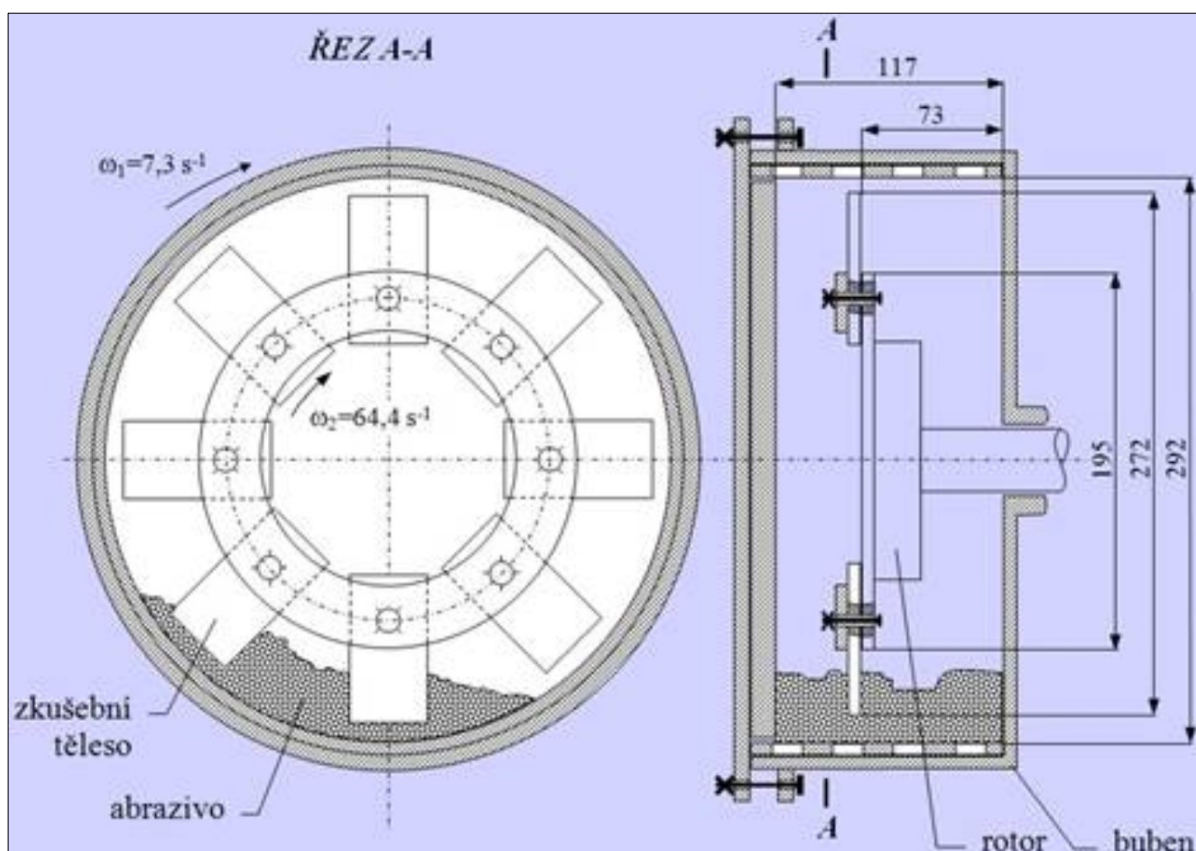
Miller Number Slurry Abrasivity Test Machine [21]
